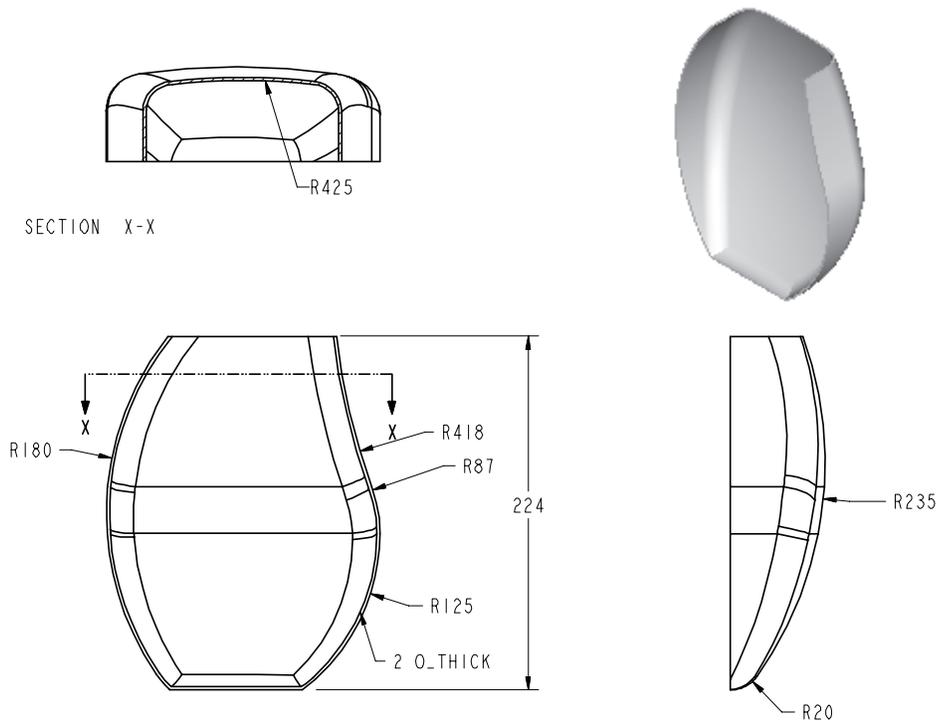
Sectioned-top, front, right-side, and isometric views of the model
